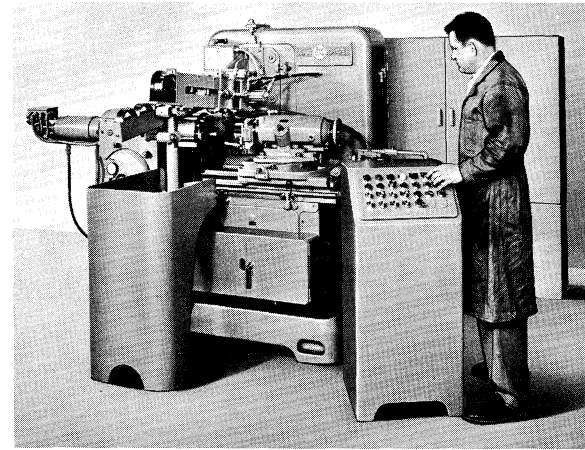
A model GCR internal gear shaver equipped with an automatic loader.
